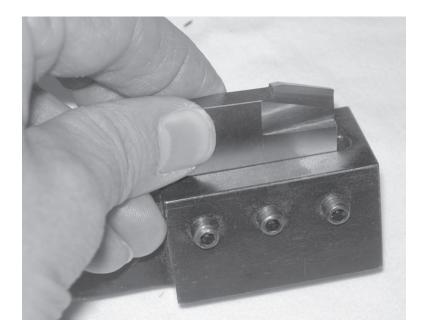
Insert the counterbore tool in the holder as shown. Tighten the three set screws on the holder.
